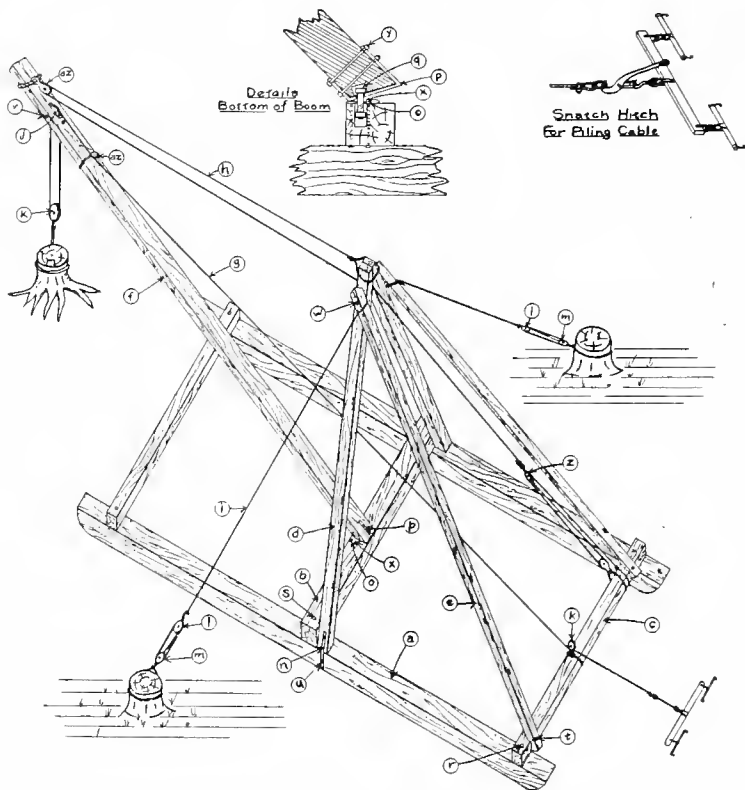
DETAIL SKETCH SHOWING CONSTRUCTION OF THE CONRATH PILER
